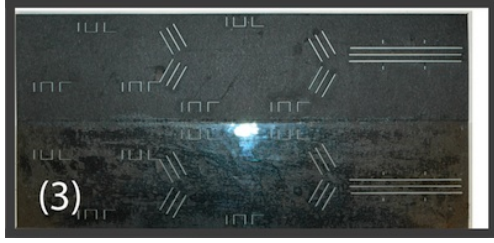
Posterboard workpiece with fold areas laser cut and polyester film attached to bottom panel [13]
